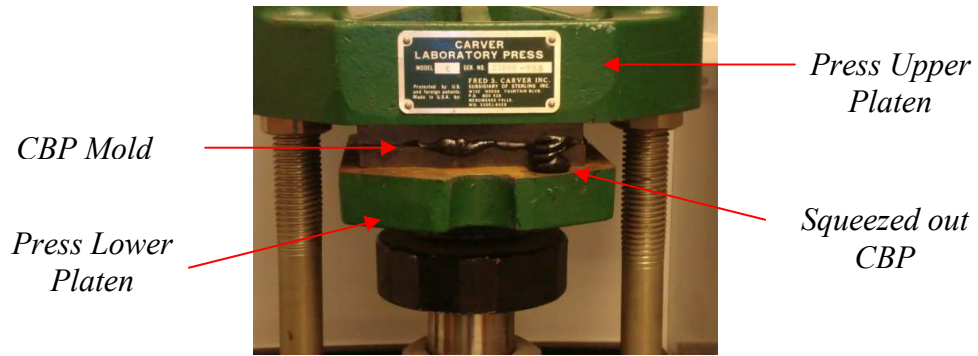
A  $6 \times 6 \times 1/32$  inches mold
